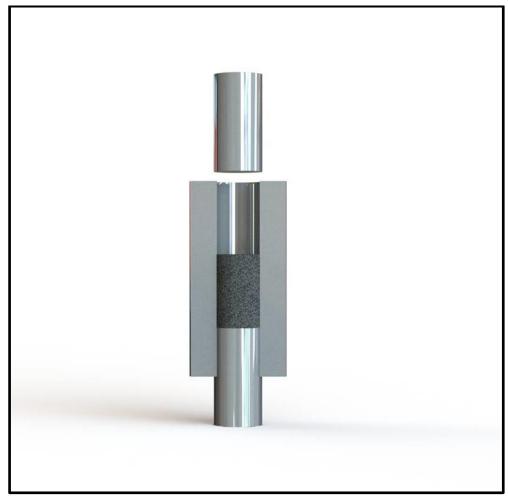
Uniaxial press technique. A piston is pressing the powder into the shape of the die.
